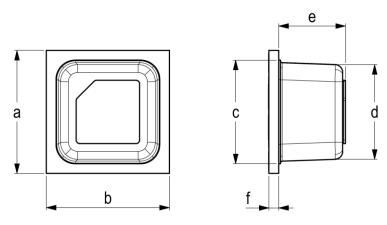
Packaging outline drawing of the SCD42: (left) top view and (right) side view. Nominal dimensions and tolerances are listed in millimeters.
